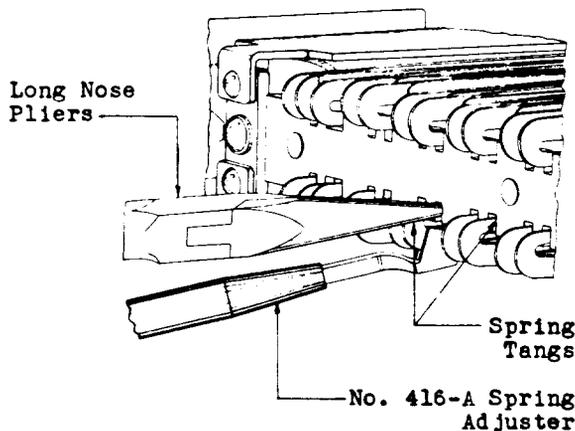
Method of Adjusting Spring Tang for Contact Separation
